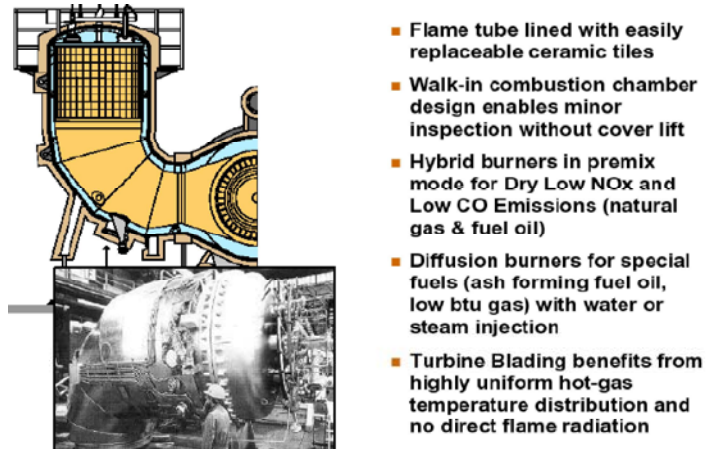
V94.2 Gas Turbine Combustion chamber features
